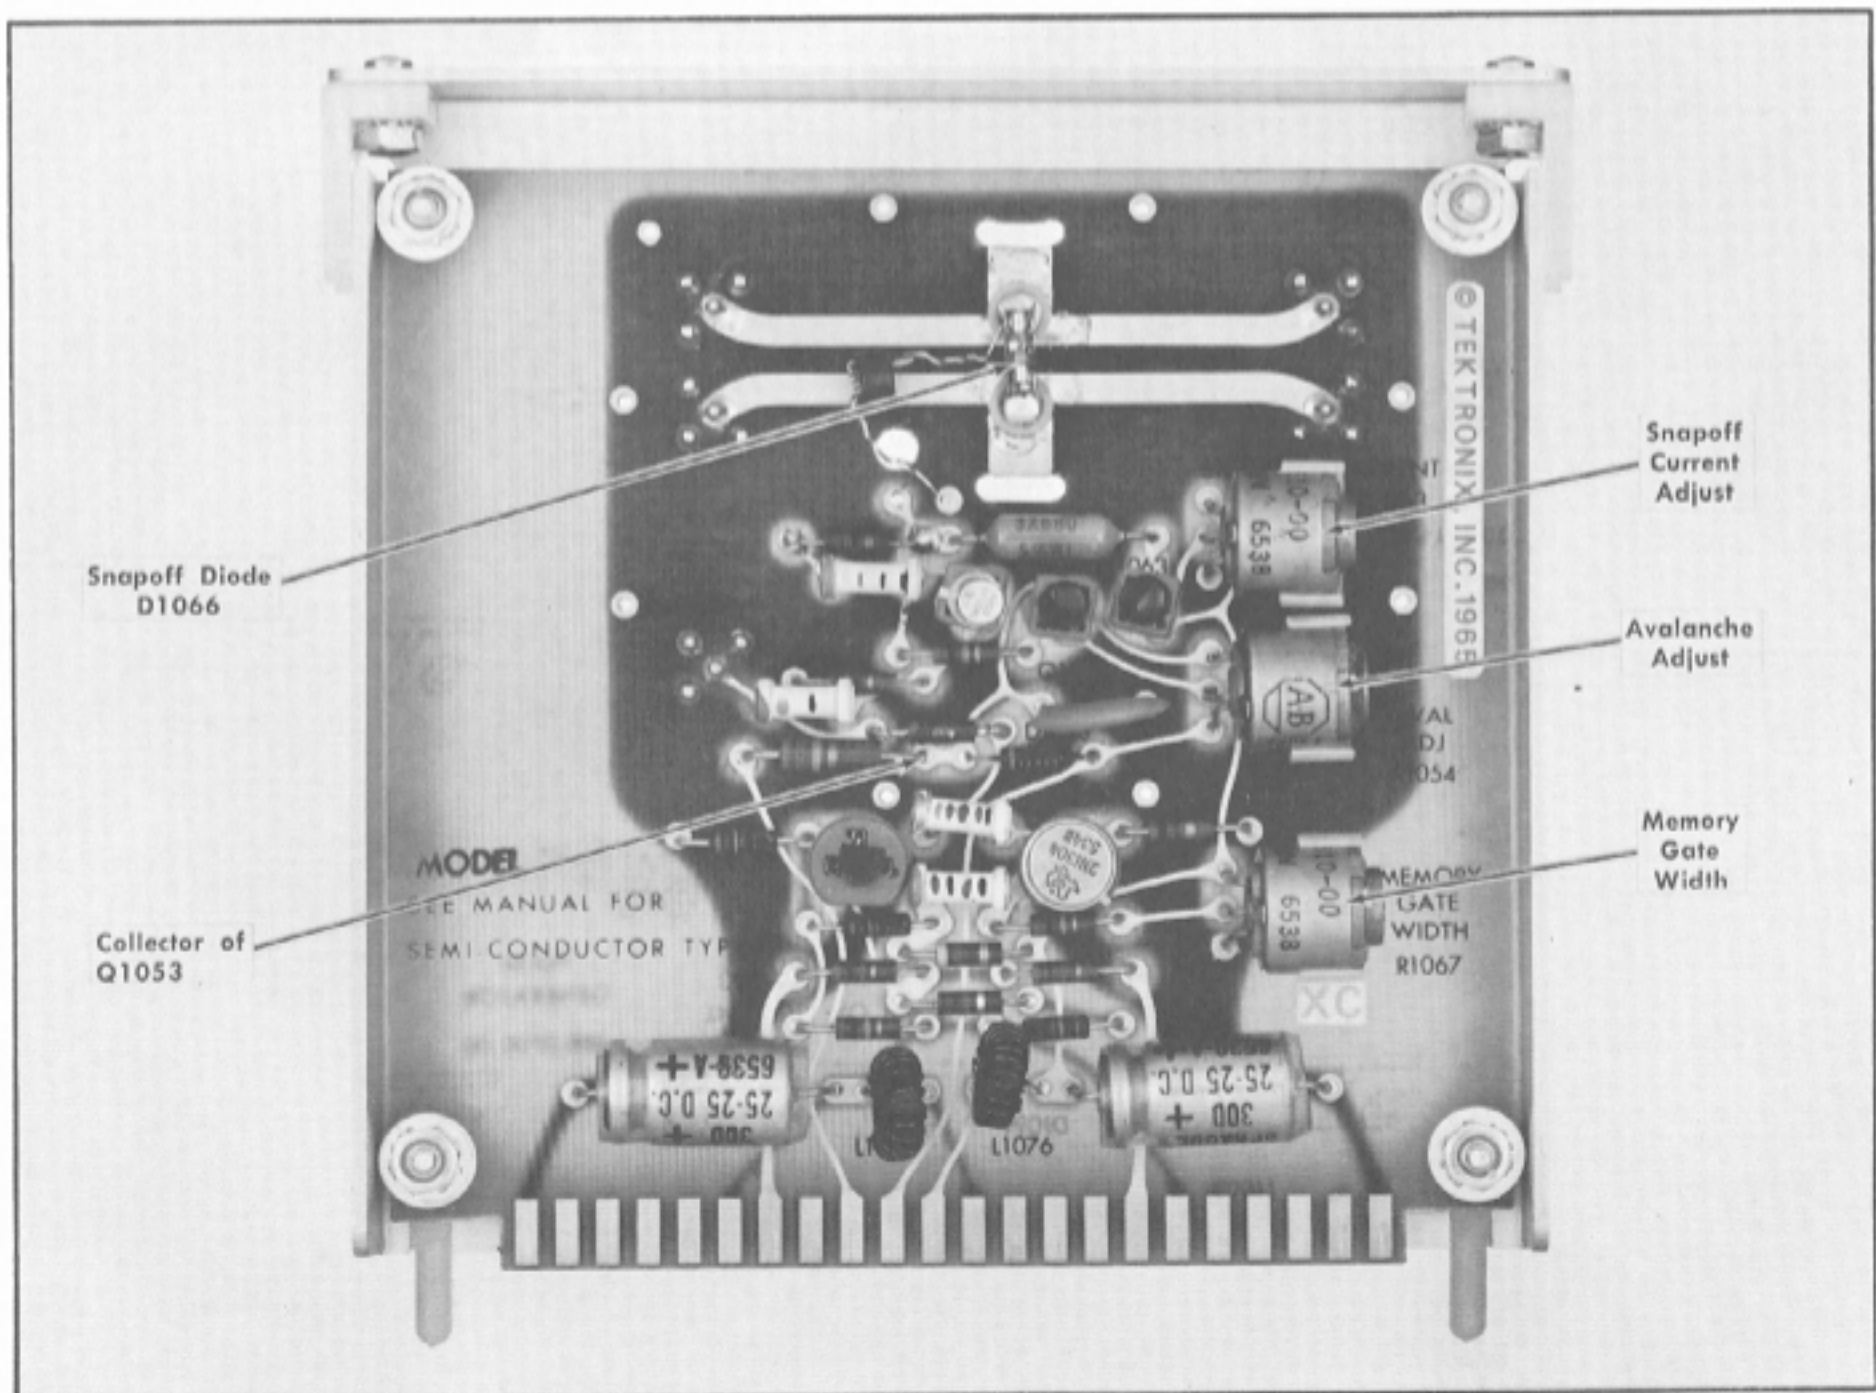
Location of controls on Pulse Generator Card Assembly.
